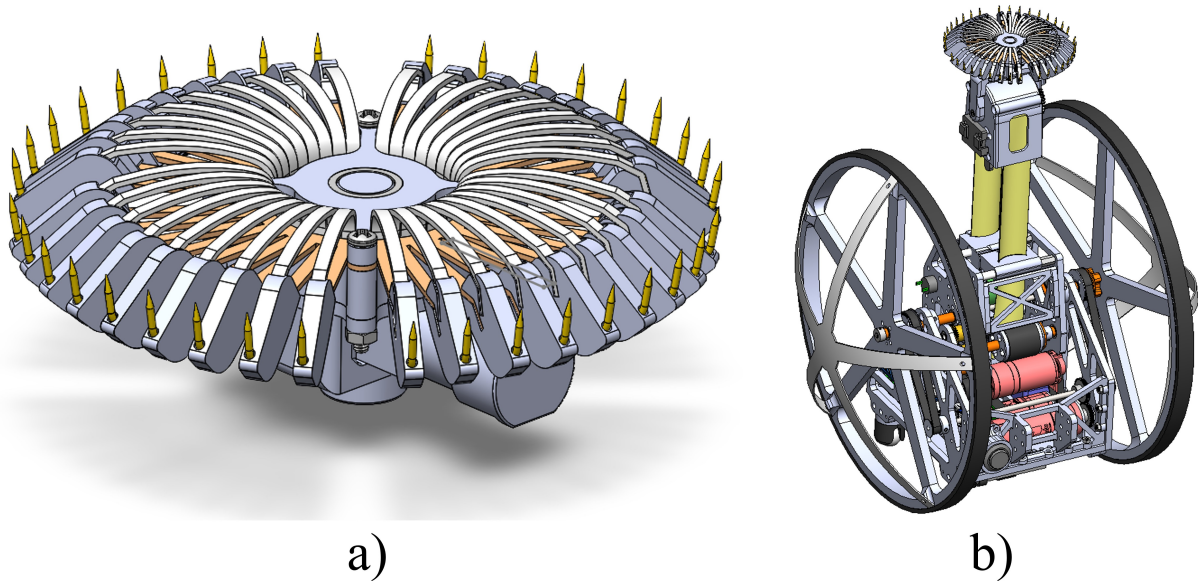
CAD of the proposed microspine gripper. a) Close up view of the gripper. Two sheets of laser-cut delrin form the top and bottom links (in white and orange). b) Full view of the gripper mounted on EEWOC.
